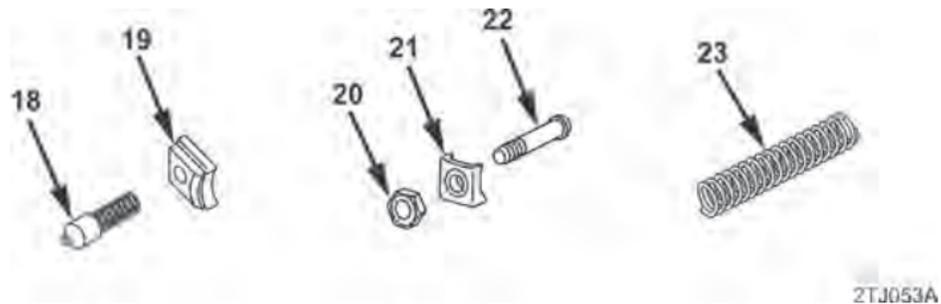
Deployment Parts Kit, PK-1 (Sheet 2 of 2).
